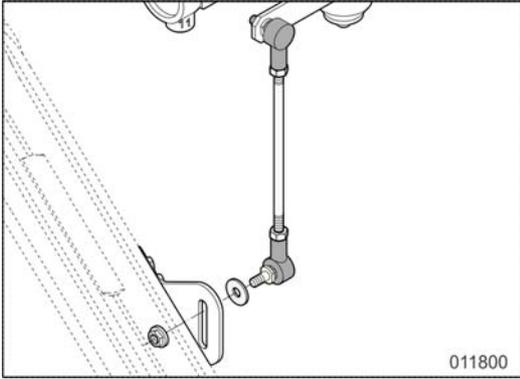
Anchorage plate for leveling valve connecting rod to suspension arm
